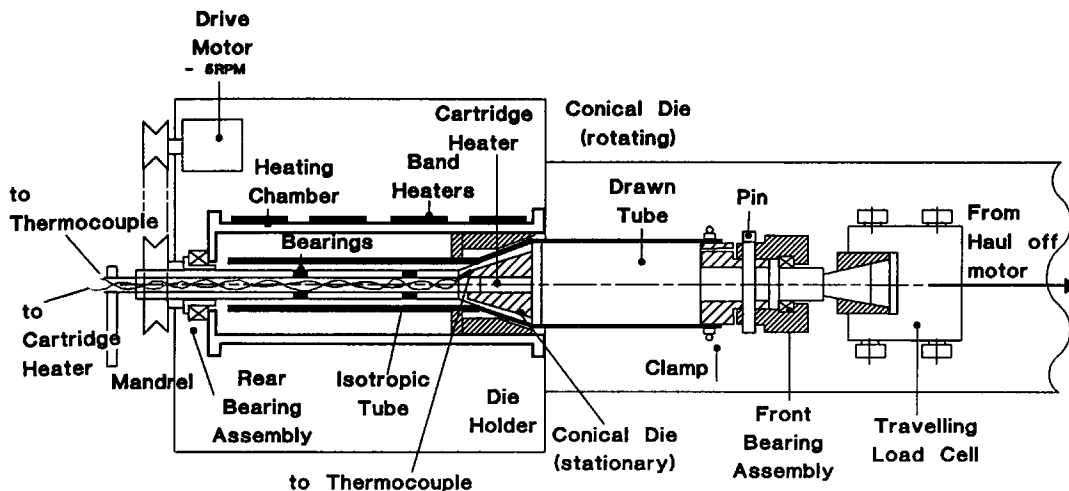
Plan of modified draw bench with rotating mandrel assembly.
